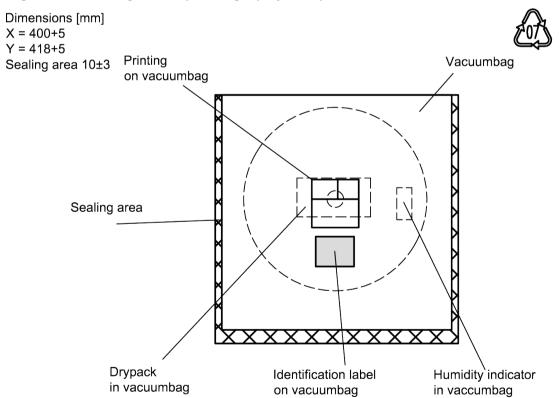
Drawing of moisture barrier bag (MBB) for reel with diameter of 330 mm.
